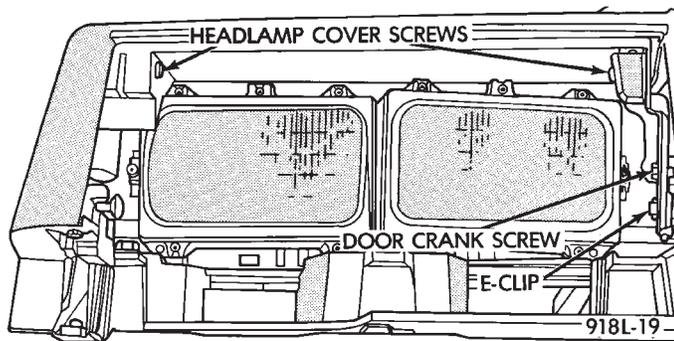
Headlamp Pivot E-Clip and Crank Screw
